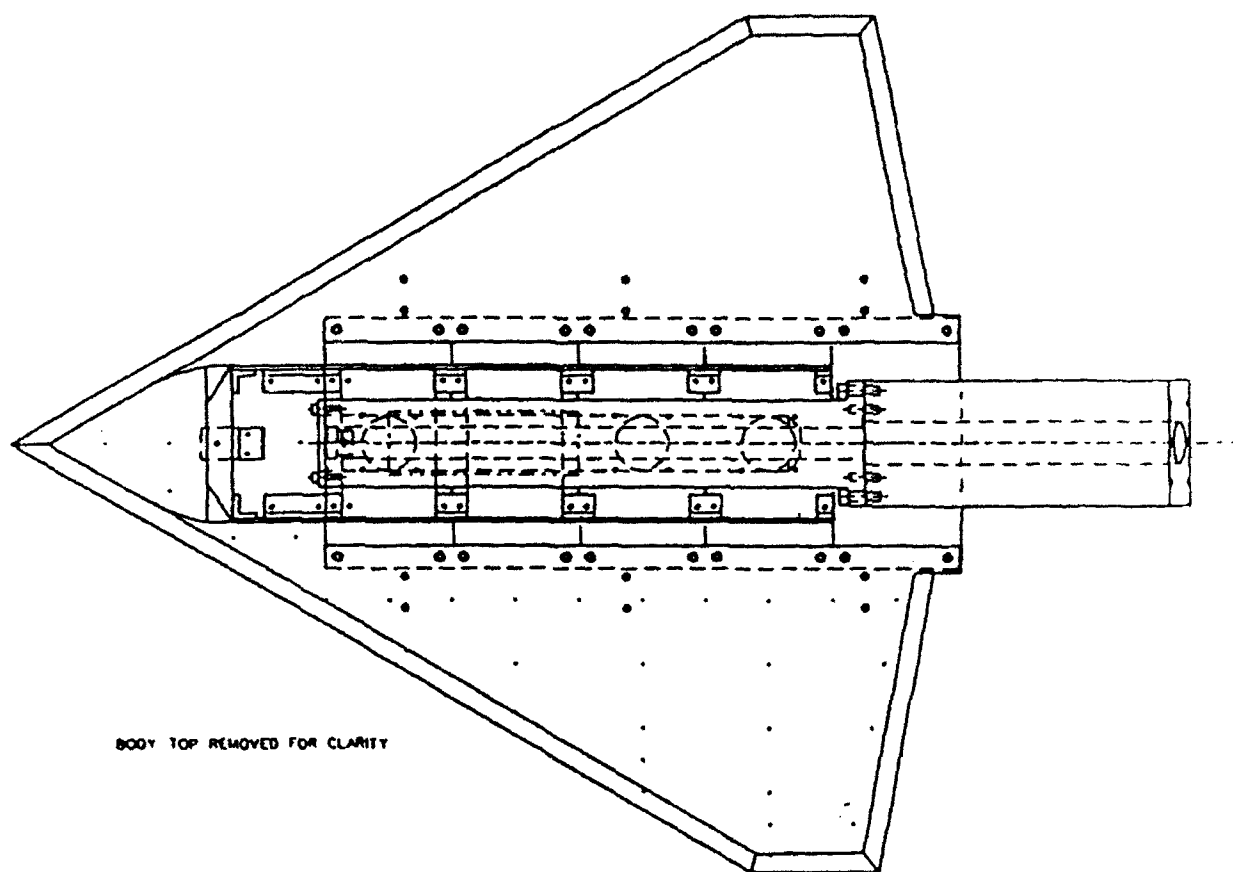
Delta wing planform and jet locations, dimensions in inches.
